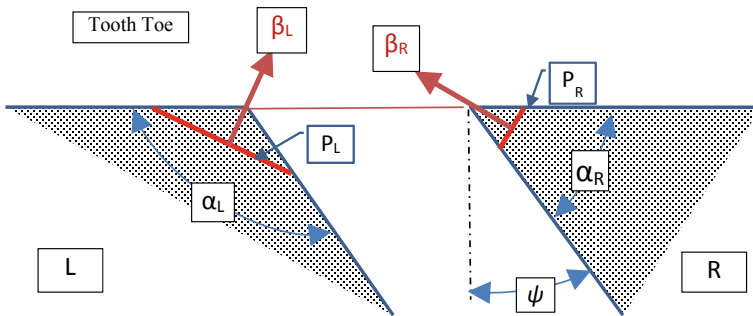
Toe/Heel chamfer angles for helical and spiral bevel gears
